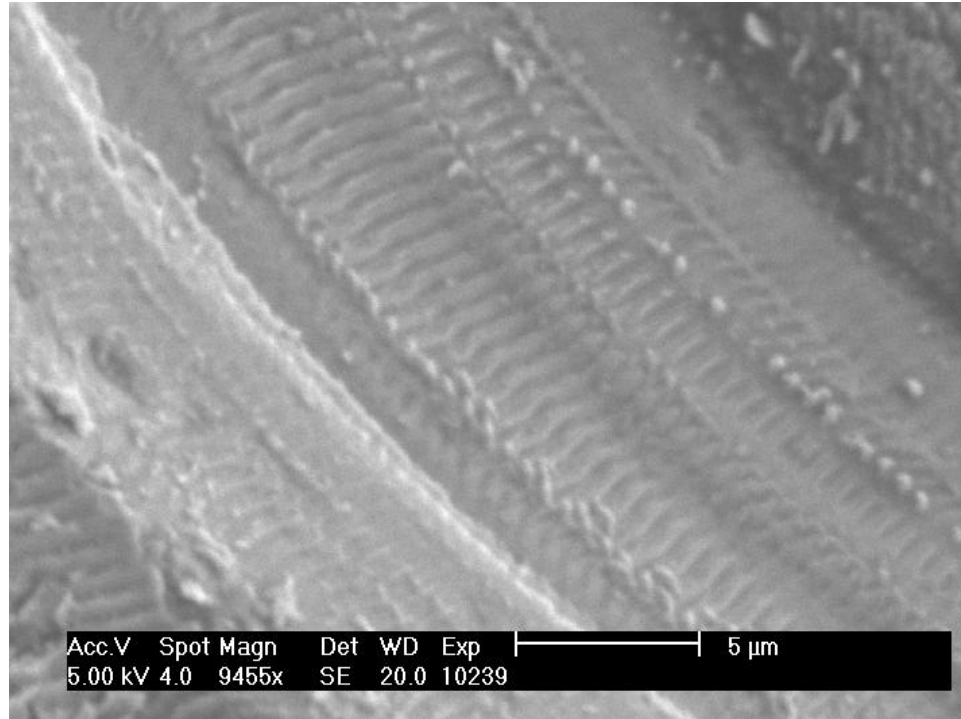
Stick slip marks on the machined surface of Si wafer
